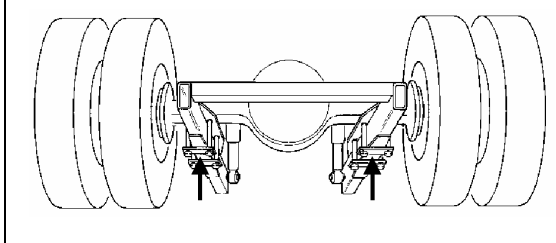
JACKING POINTS ON DRIVE AXLE OEH3B762
